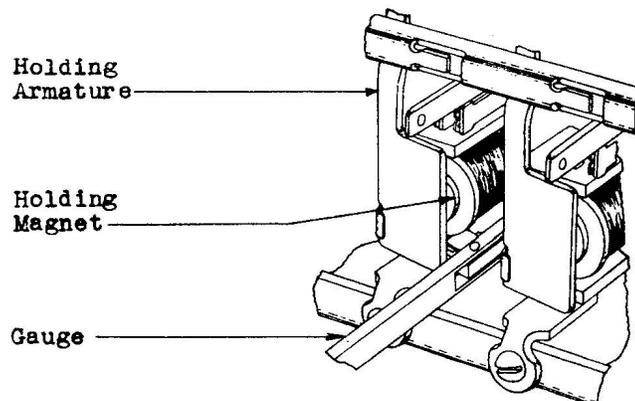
Fig. O - Thickness Gauge in Position at Standard Point of Measurement
